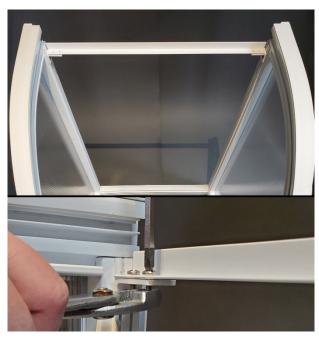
Inserting Left Wall & Right Wall into the Bottom Cross Piece
